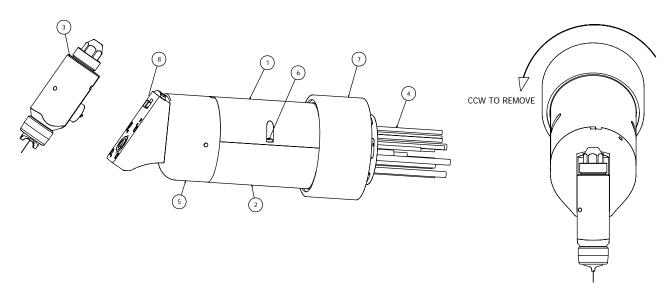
Evolver 202 60° Single Head Applicator Assembly
